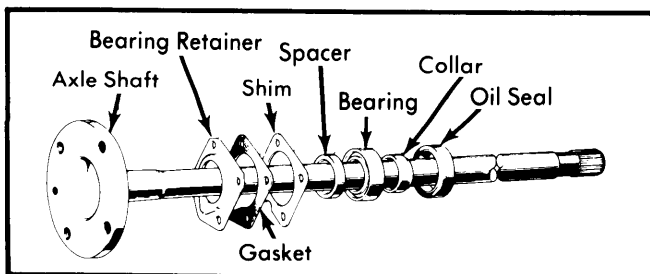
Exploded View of Axle Shaft Assembly (Except Pickup)
